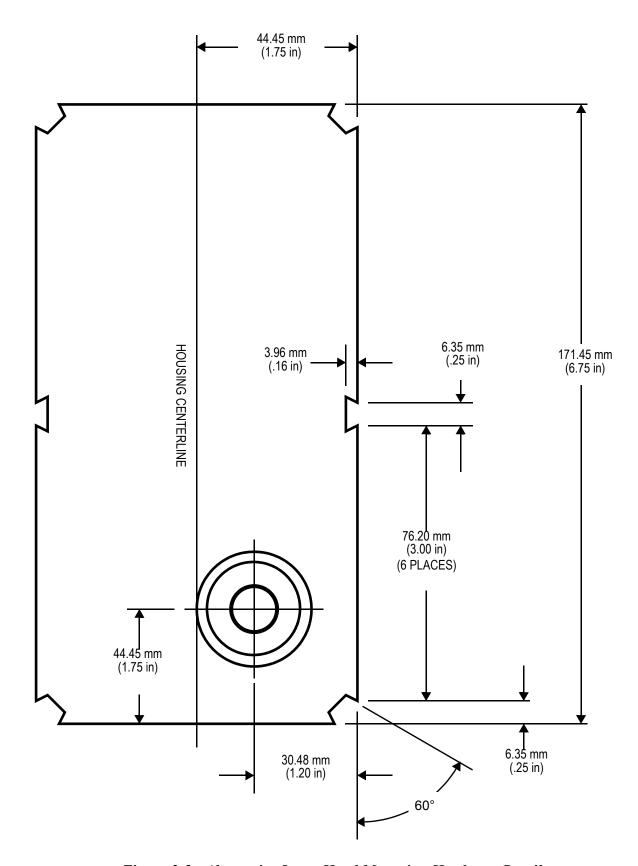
Alternative Laser Head Mounting Hardware Details
